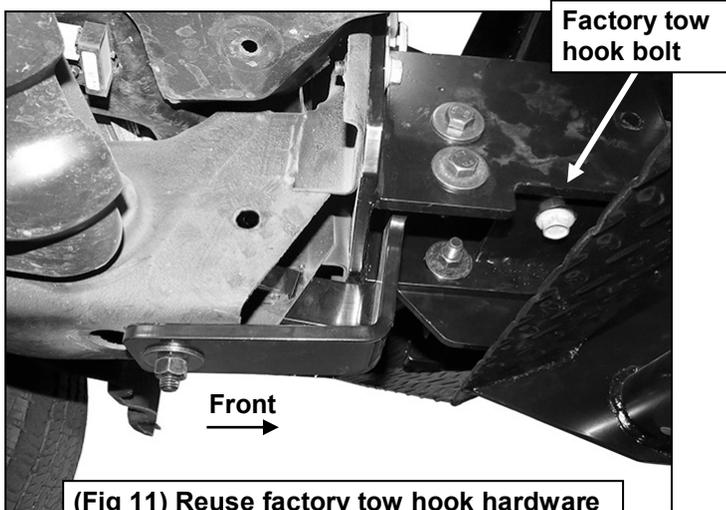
Reuse factory bumper bolts to attach Mounting Bracket to end of frame. Reuse factory tow hook hardware to attach tow hook to inside of Bracket. IMPORTANT: Insert long tow hook bolt from outside to inside only (see arrow)
